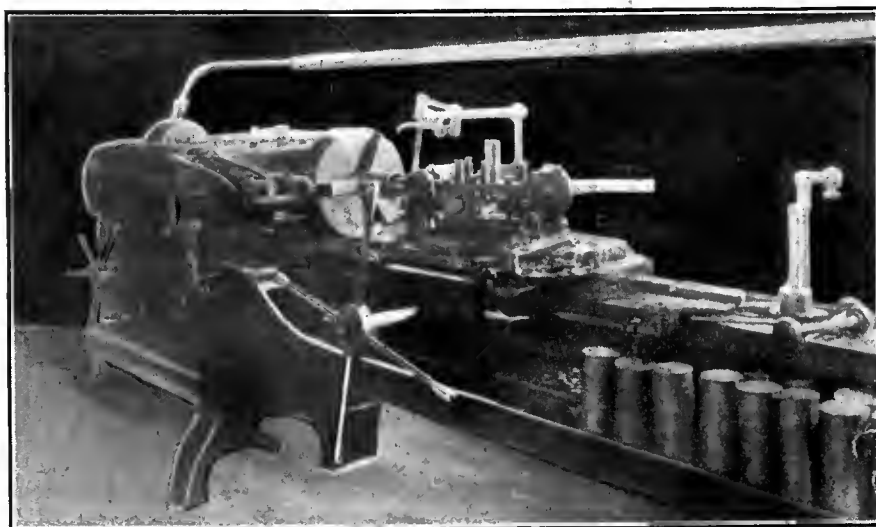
JONES & LAMSON FLAT TURRET LATHE TOOLED UP FOR BORING SHELLS.
